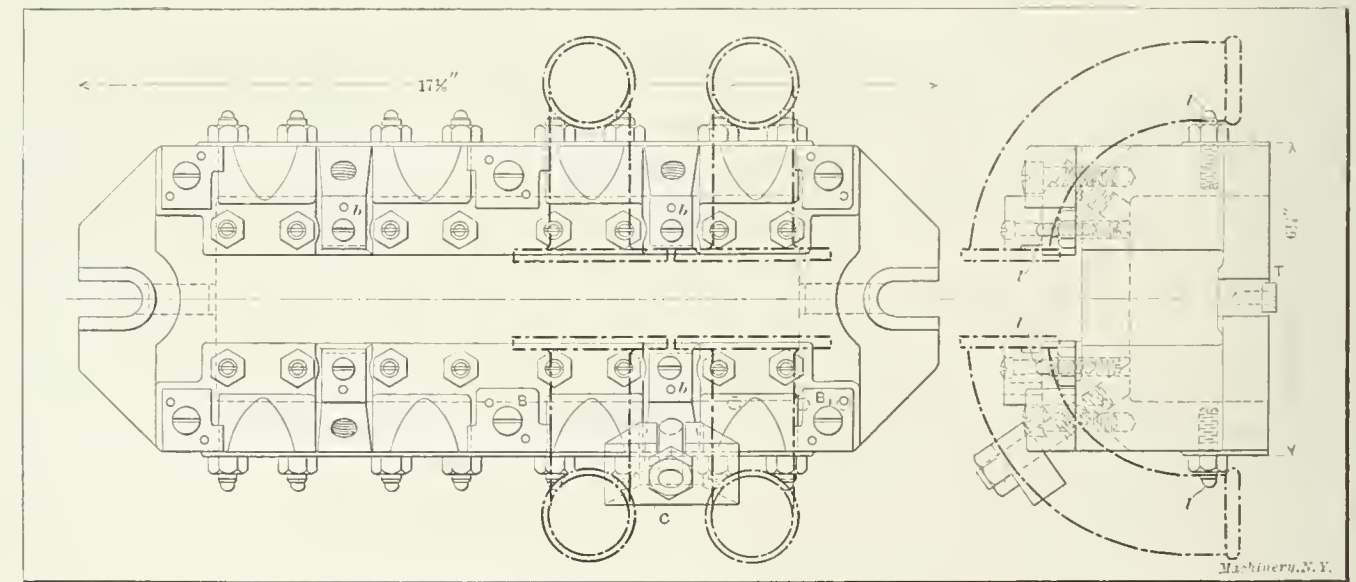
Fixture for Surfacing Flanges of Eight Exhaust Fittings simultaneously
